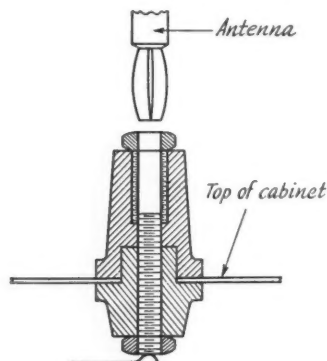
Sketch of the antenna mounting. The assembly screw is cut off flush with the hex nut where the spring of the antenna-coupling condenser makes contact.
